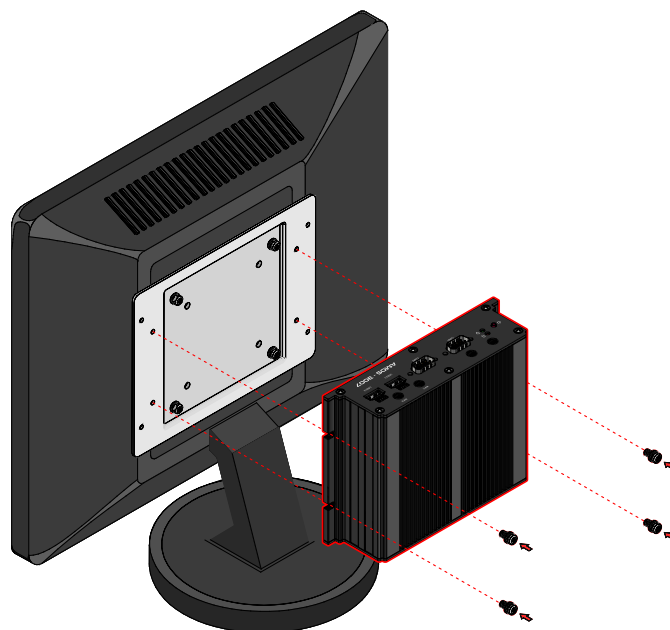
Installing VIA AMOS-3007 to the VESA mounting plate
